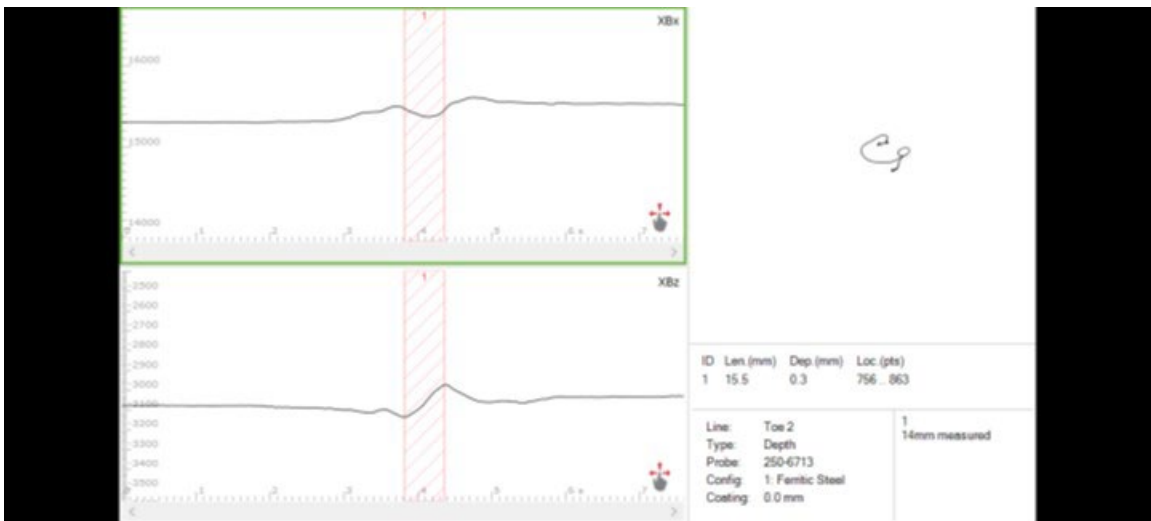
ACFM scan data of Flaw 2 for butt weld MG-16 panel
